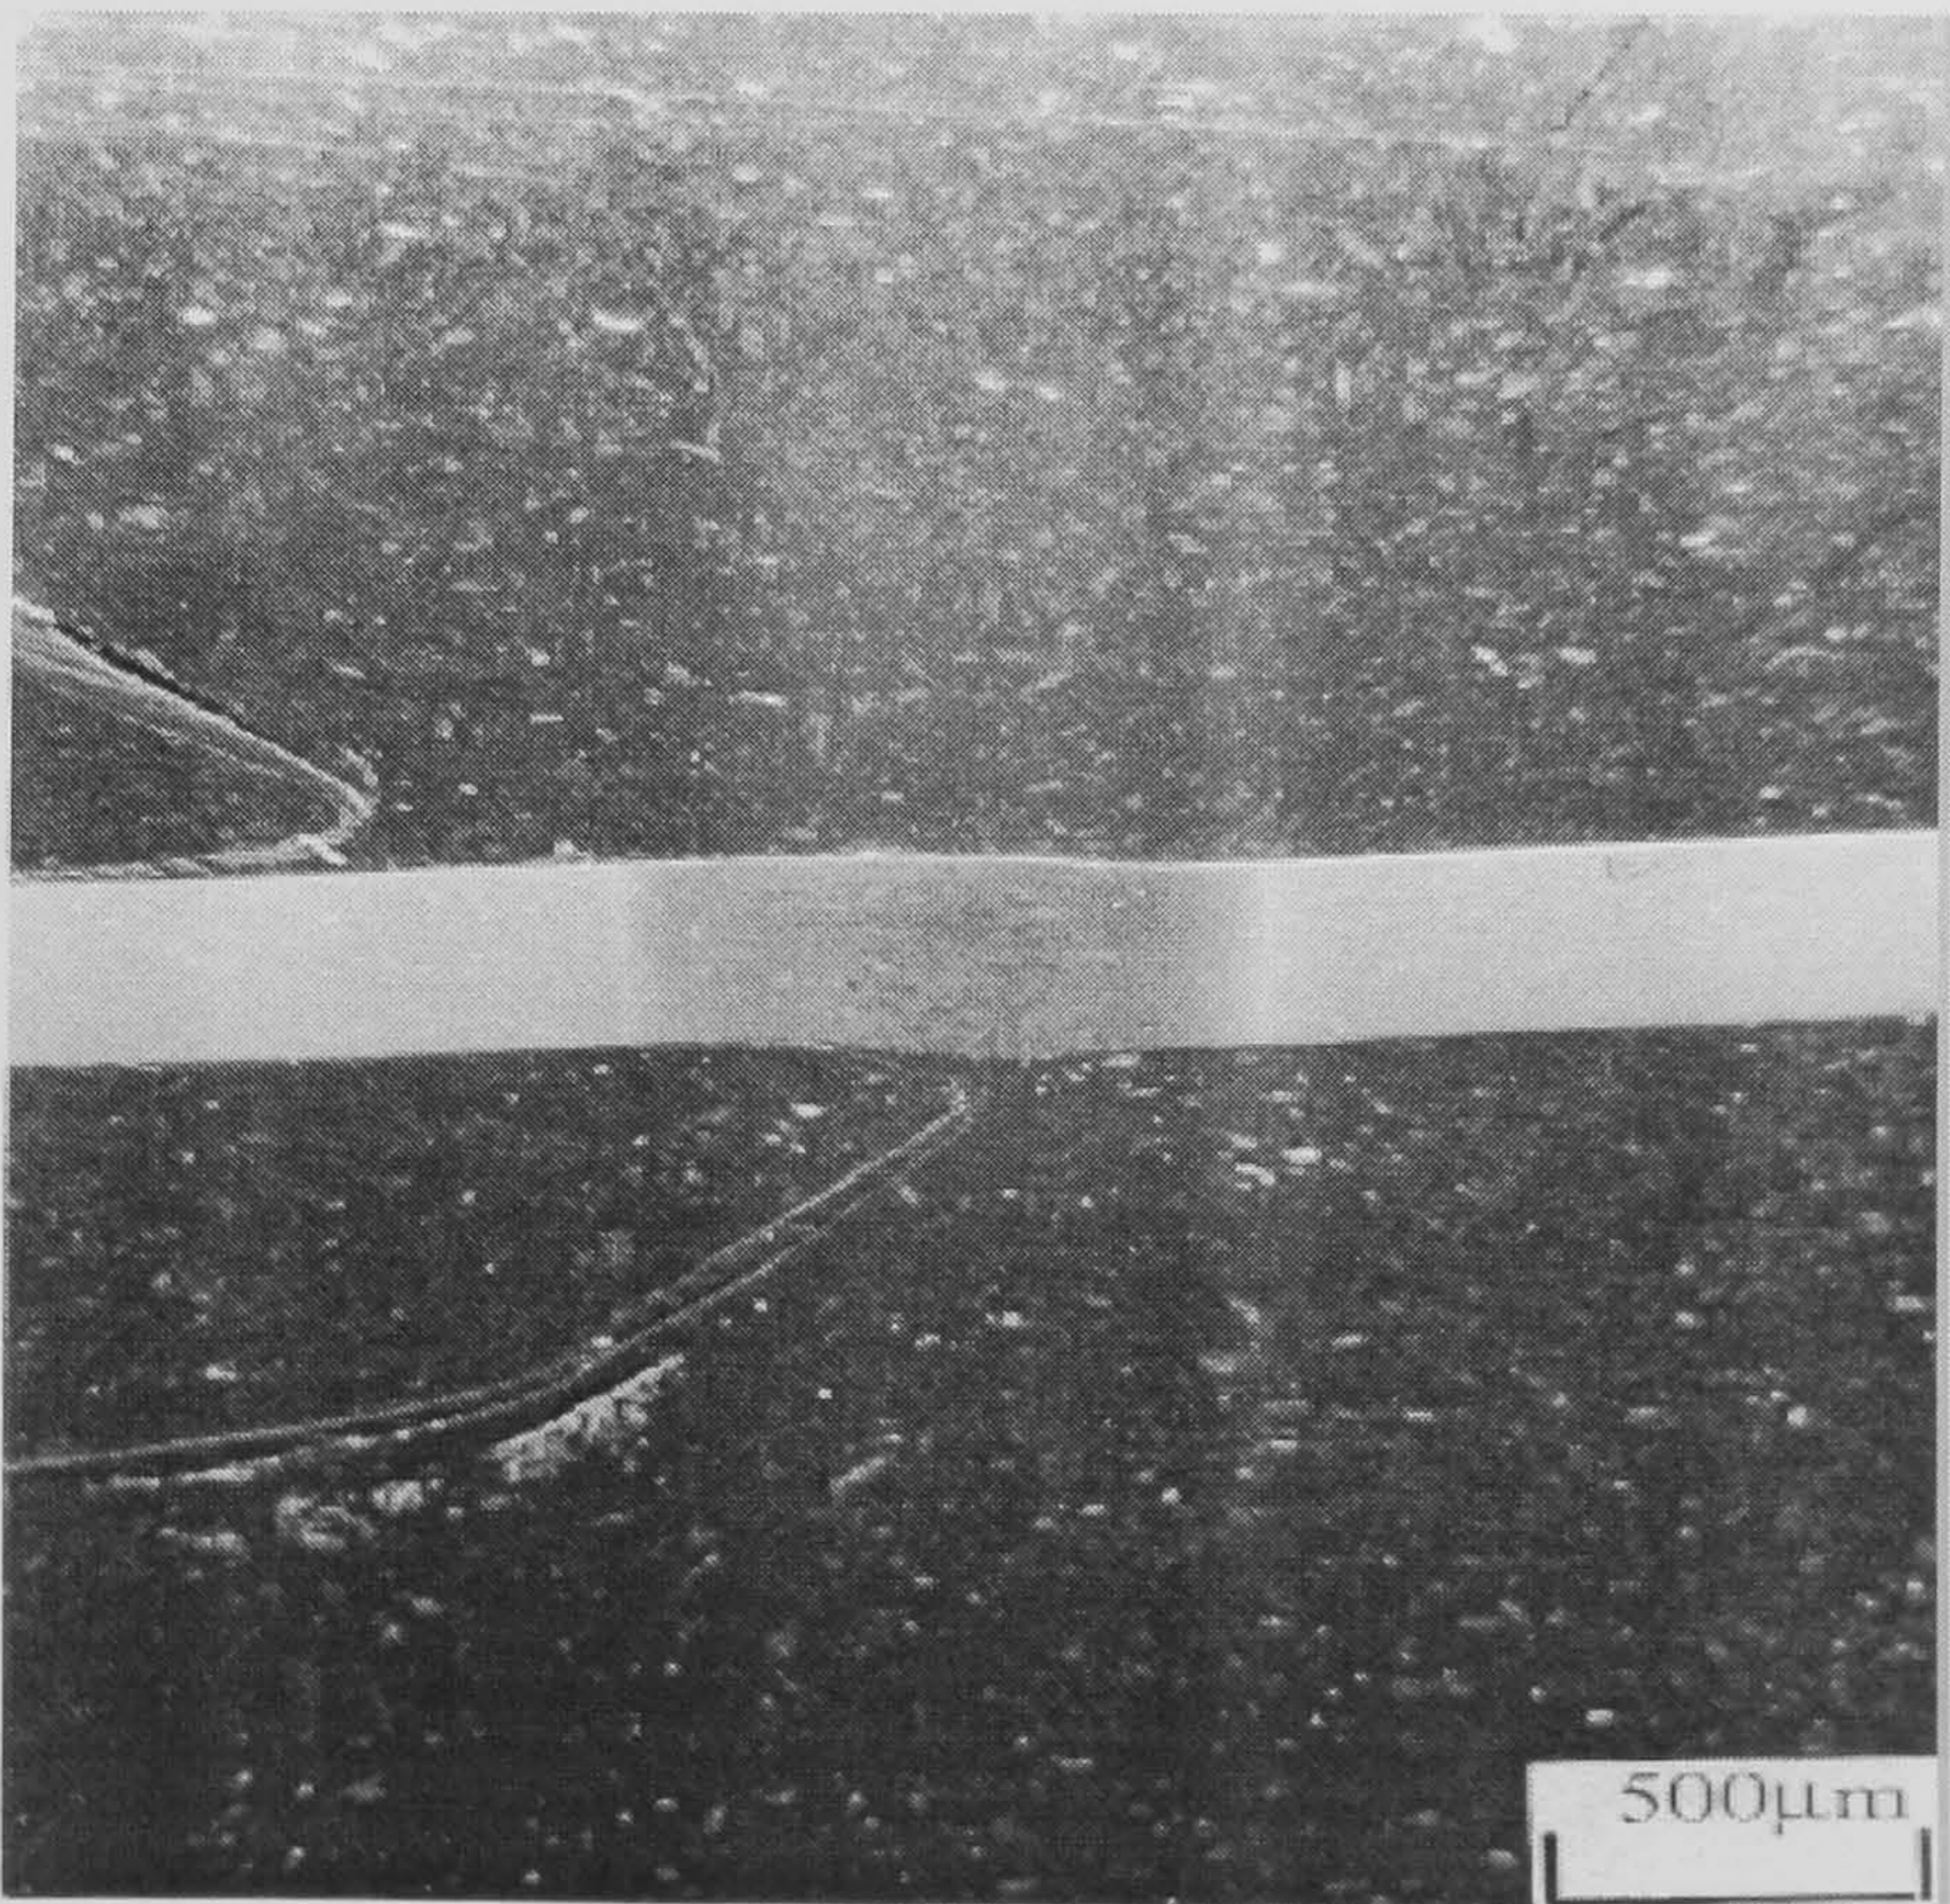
Micrograph of weld width for CO₂ laser weld at a welding velocity of 9 mm/s
